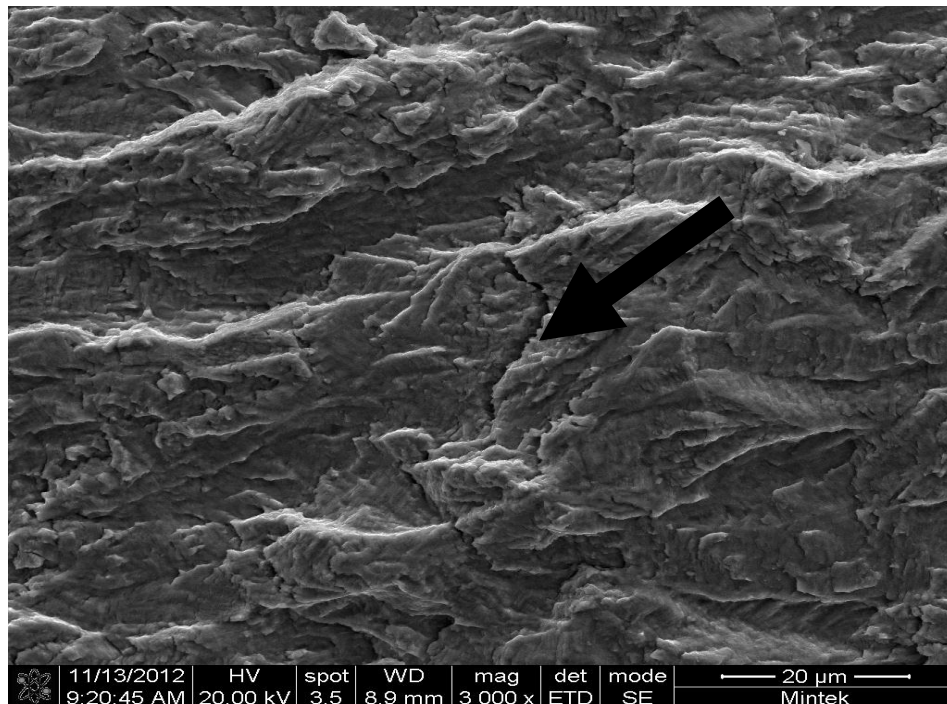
Crack initiation zone of AISI 316L sample carburised at 450°C showing brittle (tearing) with dark arrow pointing at secondary cracking within the fractured surface.
